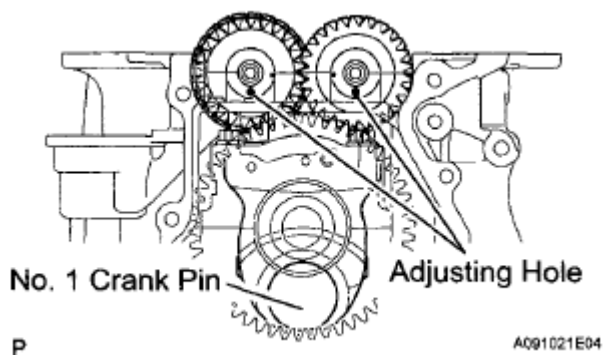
Identifying No. 1 Crank Pin And Adjusting Holes
